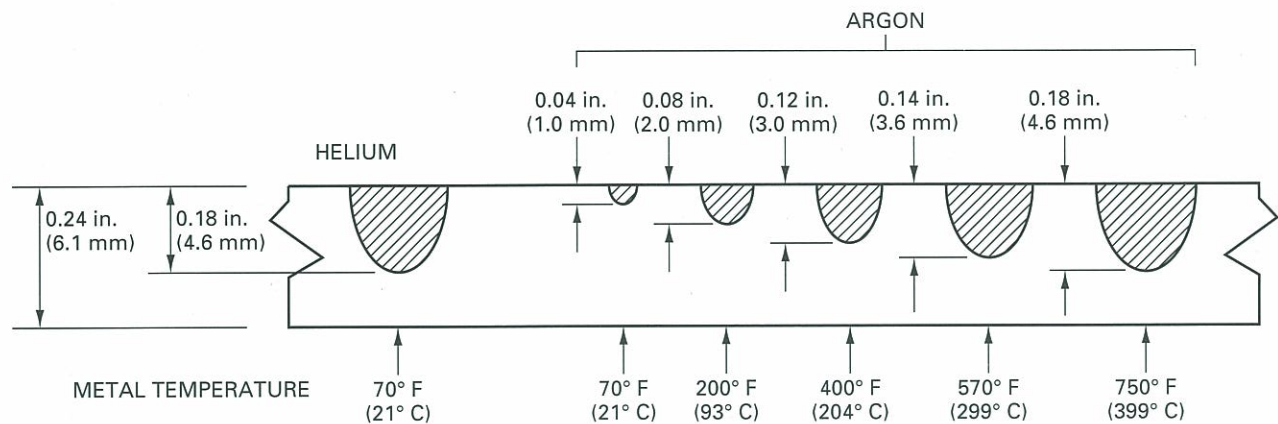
Effect of Shielding Gas and Preheat Temperature on Weld Bead Penetration in Copper when Gas Tungsten Arc Welded with 300 A dc at a Travel Speed of 8 in./min (3.4 mm/sec)
